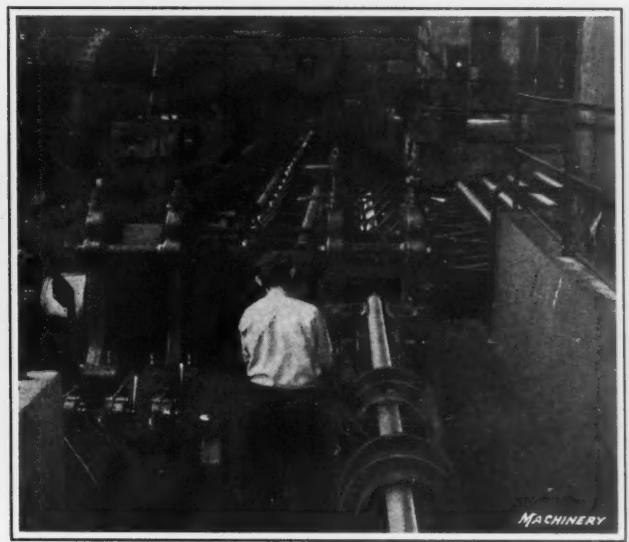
Reheated Tube passing through the Sizing or Finishing Rolls which give the Exact Diameter Required
